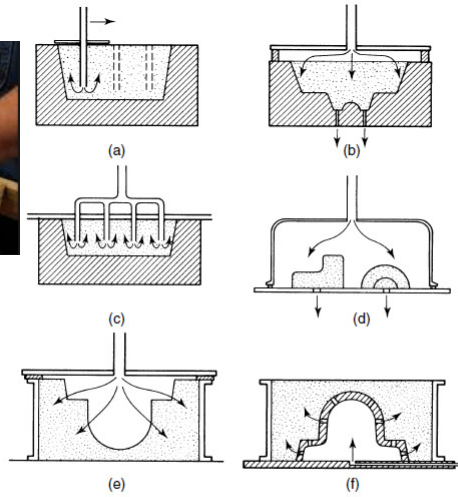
Examples of systems for carbon dioxide hardening of cores and mould parts: (a) progressive treatment using single probe, (b) cover board or hood, (c) multiple probe and manifold, (d) hood over previously stripped cores, (e) treatment of mould after pattern draw, (f) passage of gas through hollow pattern
